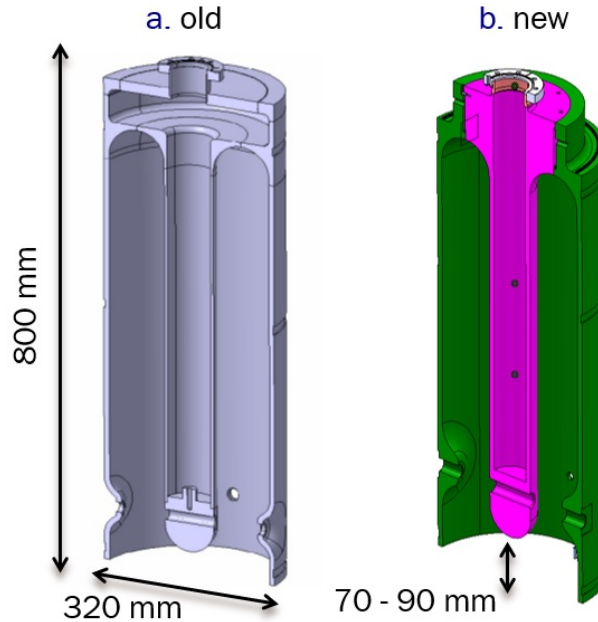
Old and new design for the superconducting cavities. The original prototype from rolled copper sheets with the helium reservoir on top is presented in (a) and the machined copper cavity design is shown in (b).
